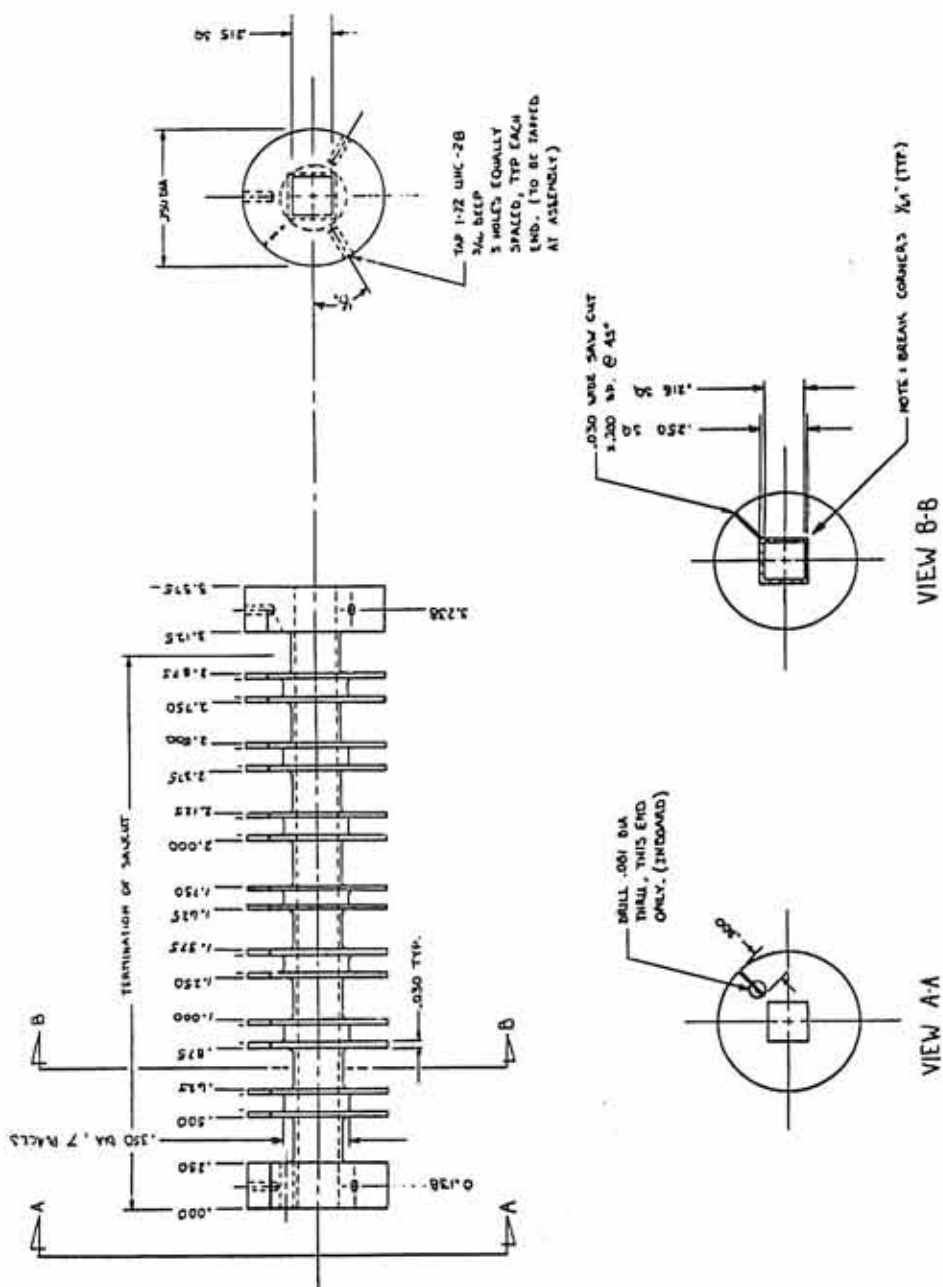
A sketch of the Polar and Wind search coil bobbins. The primary windings are located in sections 1 through 7. The calibration winding is located in section 8.
